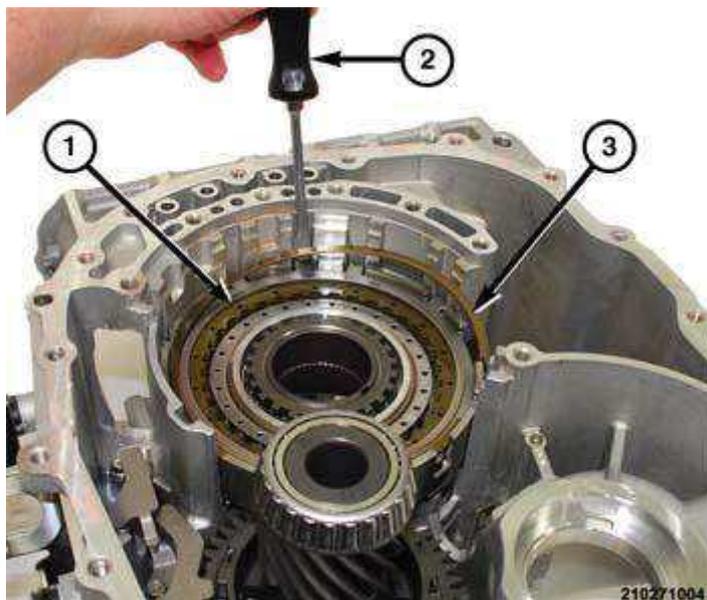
Underdrive Brake, Underdrive Brake Drum, & Large Snap Ring
